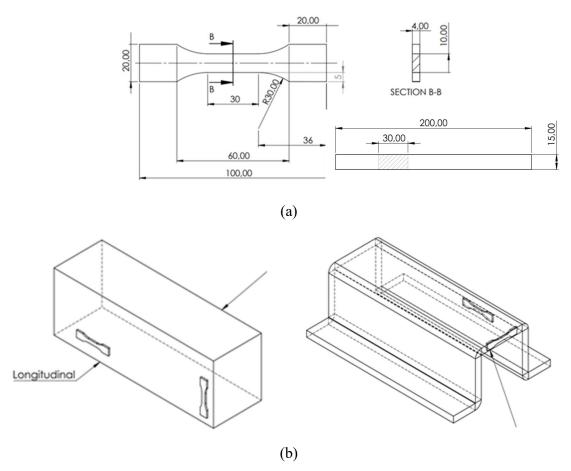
Example of required specimens; (a) Tensile test sample and (b) cutting specimens from the components.
